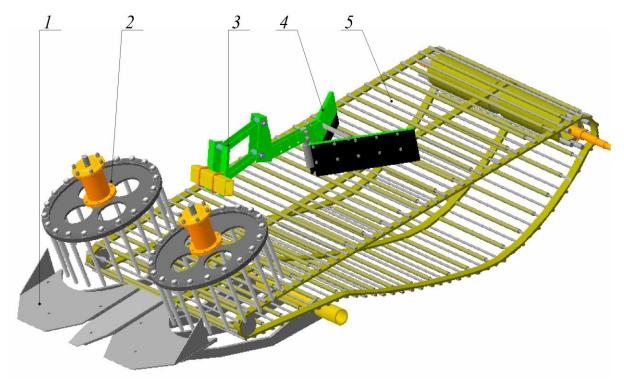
Digging and separating equipment for the potato harvesting machine: 1) digger shovel; 2) rod drum; 3) parallelogram mechanism; 4) distributor; 5) separating elevator
